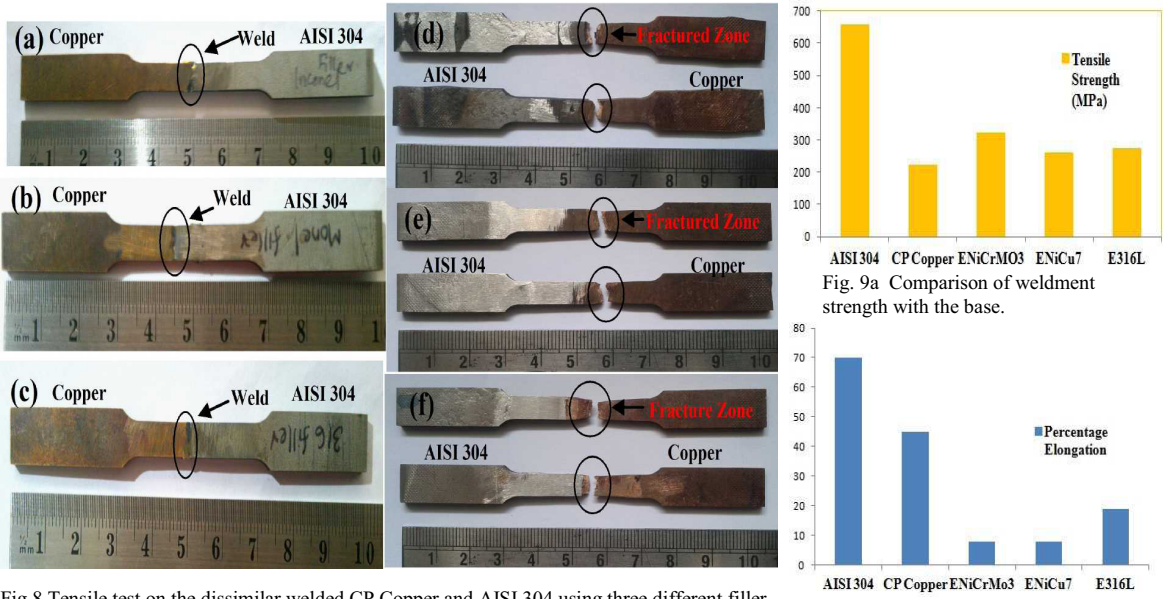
Tensile test on the dissimilar welded CP Copper and AISI 304 using three different filler materials. Figure shows the specimen before and after fracture. (a, d)ENiCrMo3, (b,e) ENiCu7 and (c,f) E316L.
